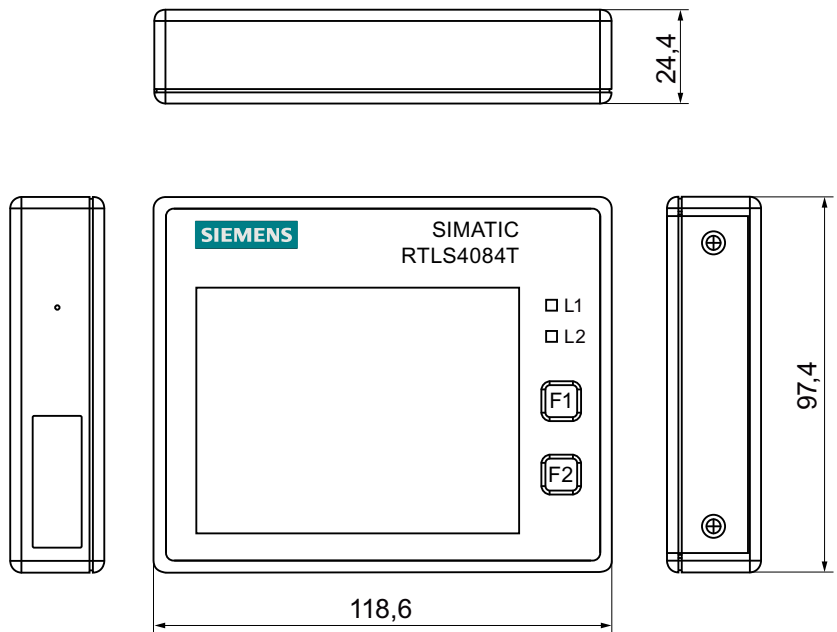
Dimension drawing SIMATIC RTLS4084T - All dimensions specified in millimeters
